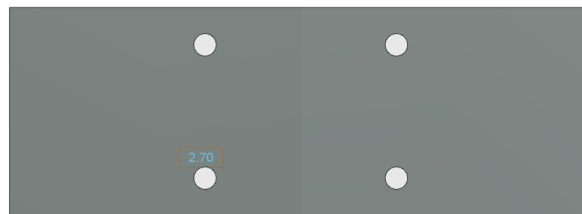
Internal perforation of 11.00 mm through which the PAW will circulate and external perforation of 13.283 mm through which the connector will be threaded
